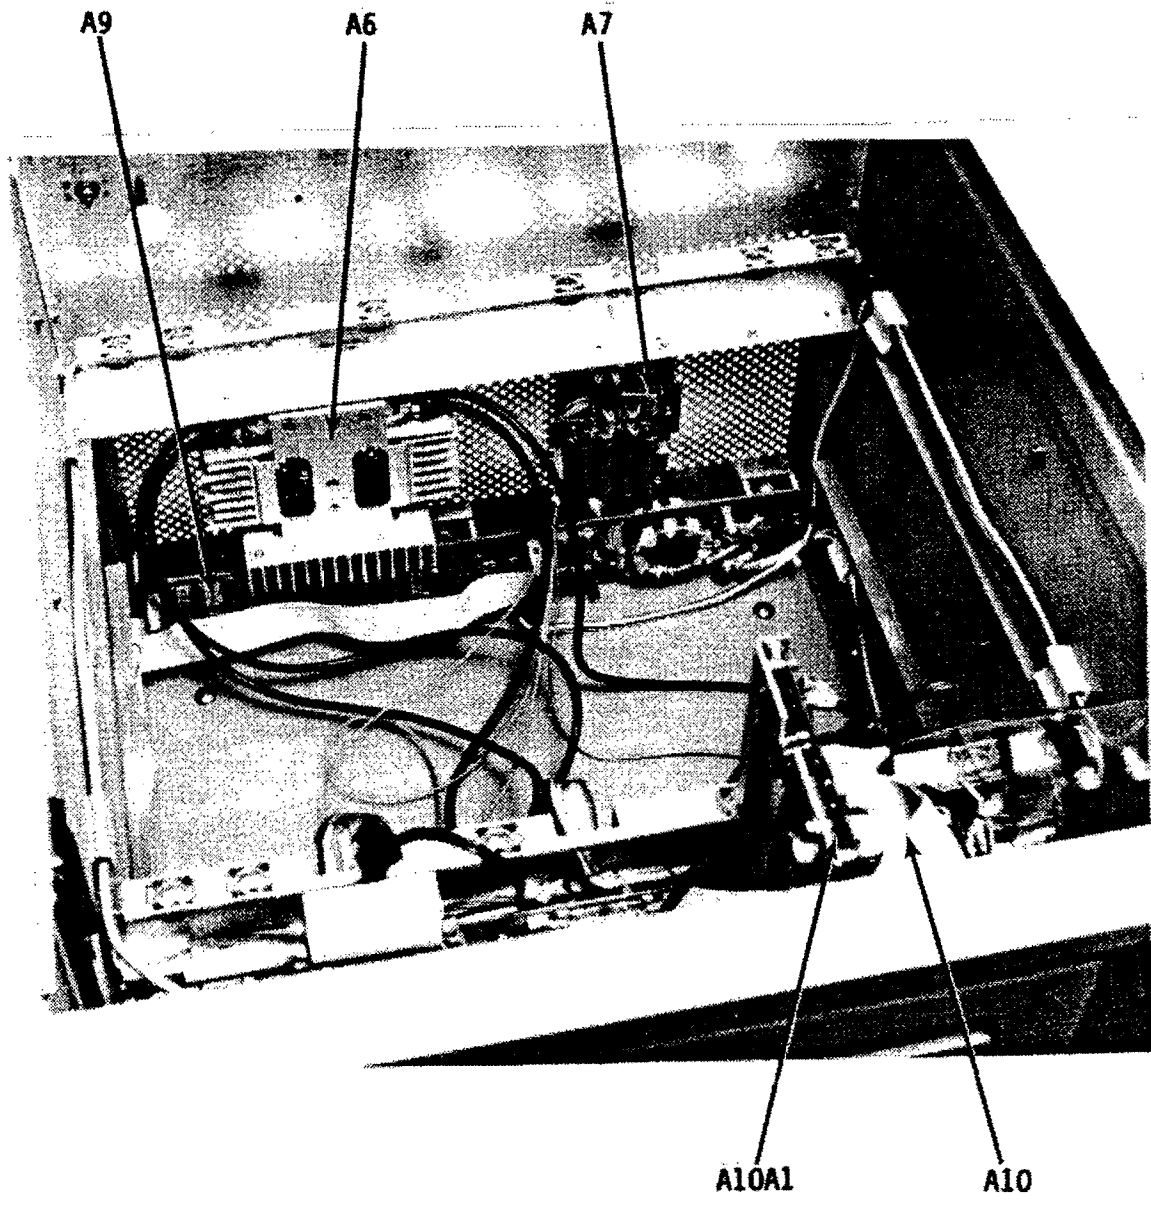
(Sheet 4/8) Major Assembly Locations.
